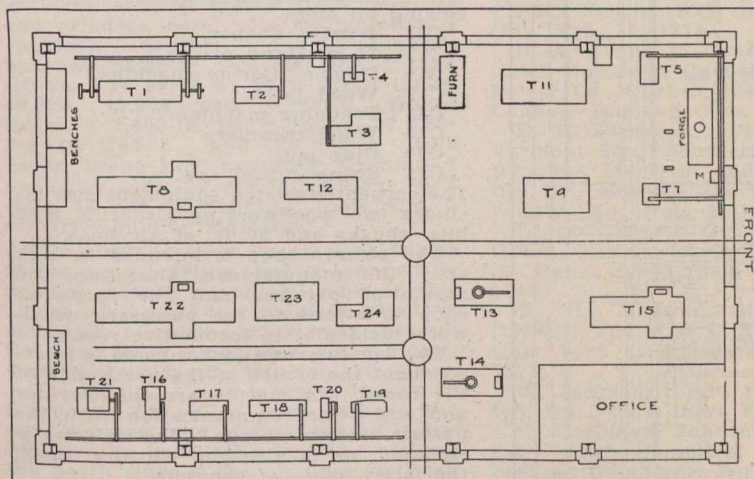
Plan and Tool Layout of Frog and Track Shop.
